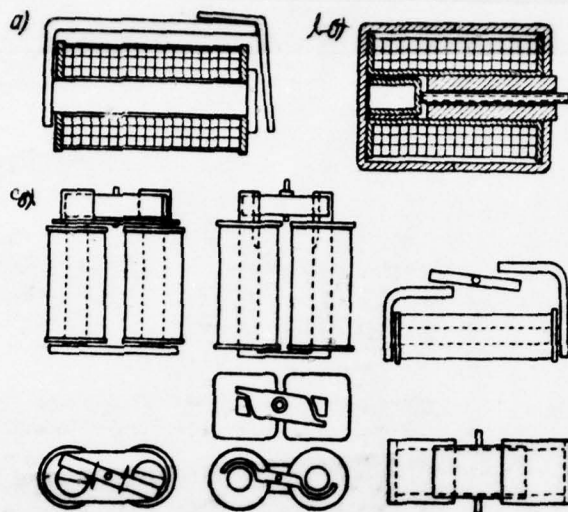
Outlines of magnetic systems of relay: a) valve type; b) solenoid type; c) rotary type.
